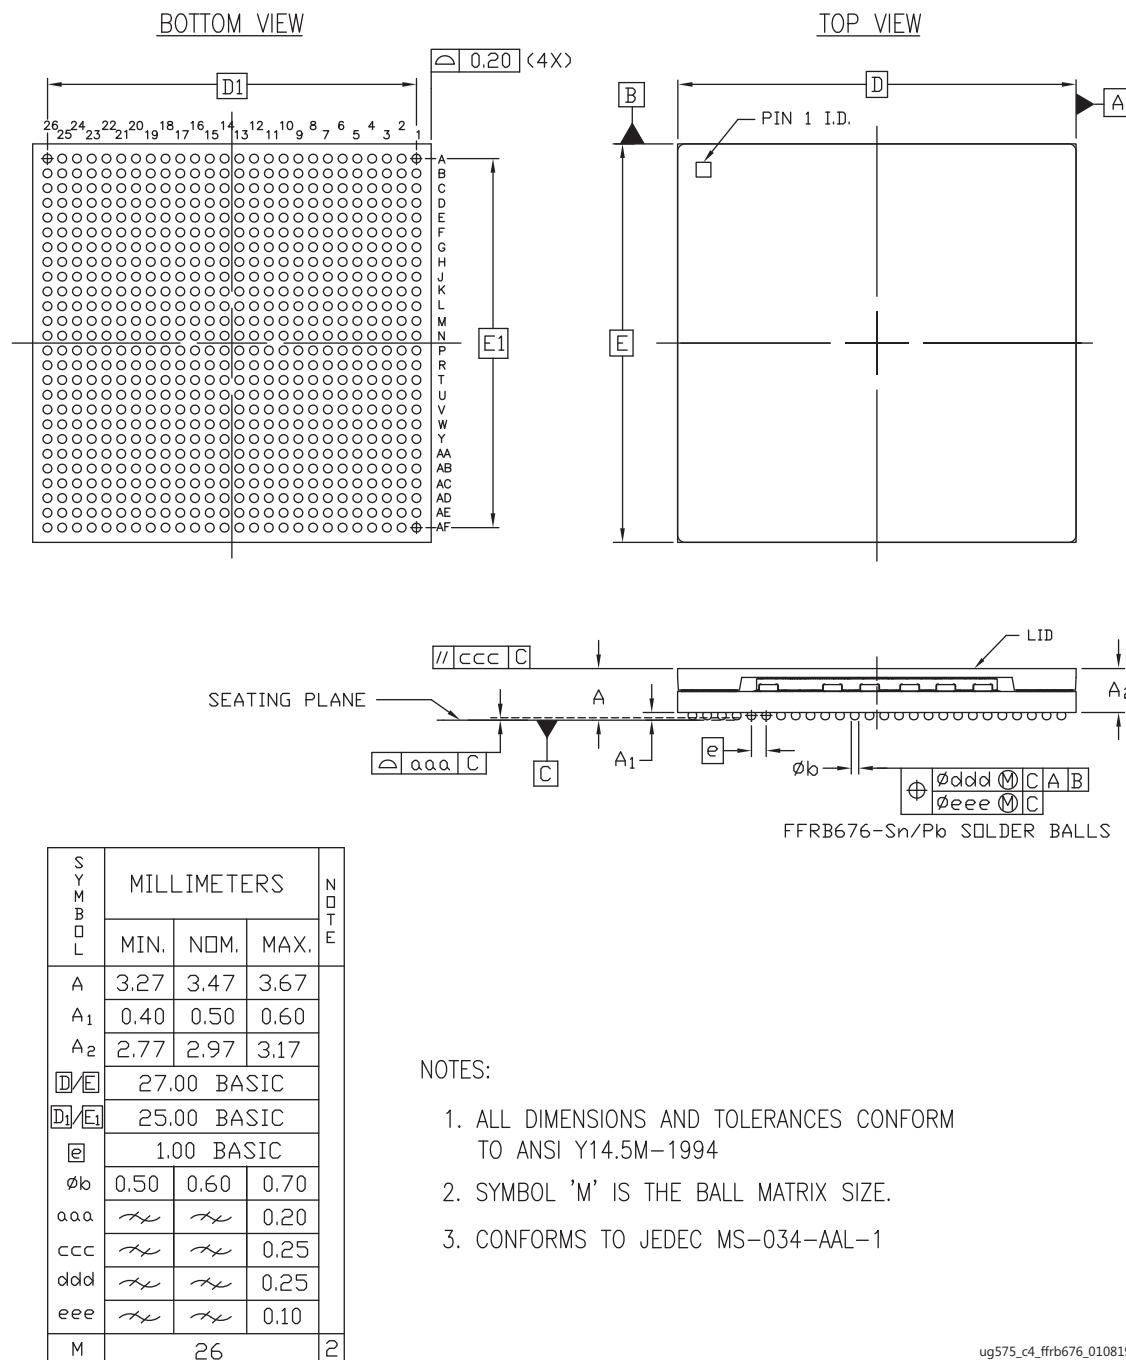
Package Dimensions for FFRB676 (XQKU5P)
